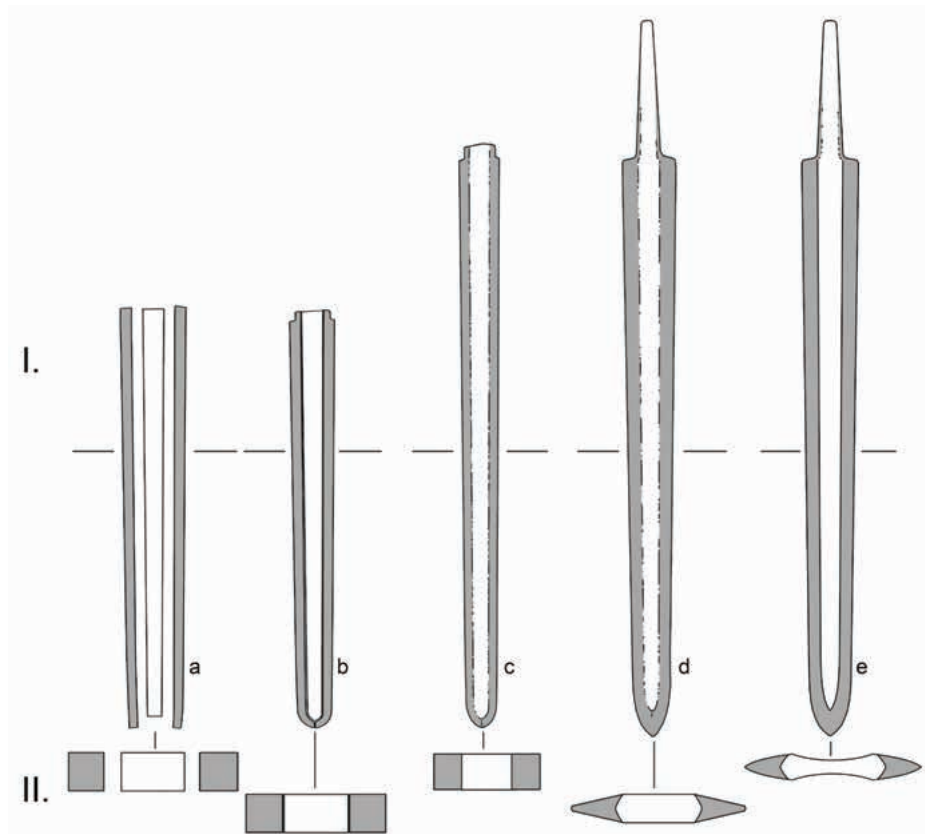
One of the possible methods to make a sword blade (here with an iron core and edges of steel); a – pieces of iron and steel are forged into rods of appropriate dimensions; b – the rods are shaped and assembled together into a form of a billet; c – the billet is made by welding the individual rods together; d – the billet is forged into a rough shape of the blade (still without fuller); e – the blade is provided with a fuller, heat treated and ground into the final shape. I – semi-products in the process of the blade manufacture, II – cross sections of the semi-products in approximate half of their length. Drawing by J. Hošek.
